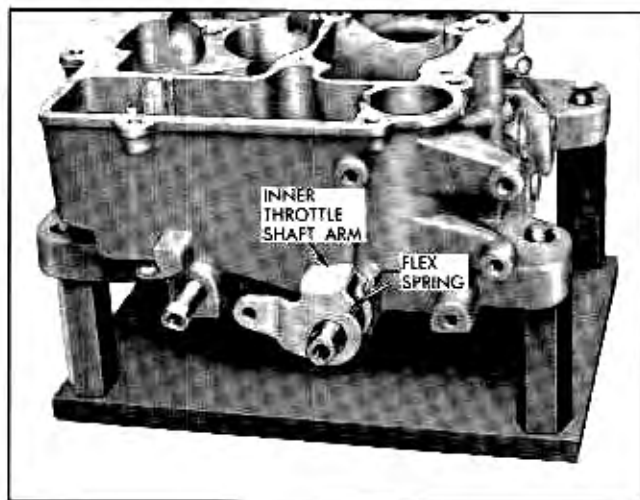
B-85 Inner Throttle Shaft Arm and Flex Spring Installed
